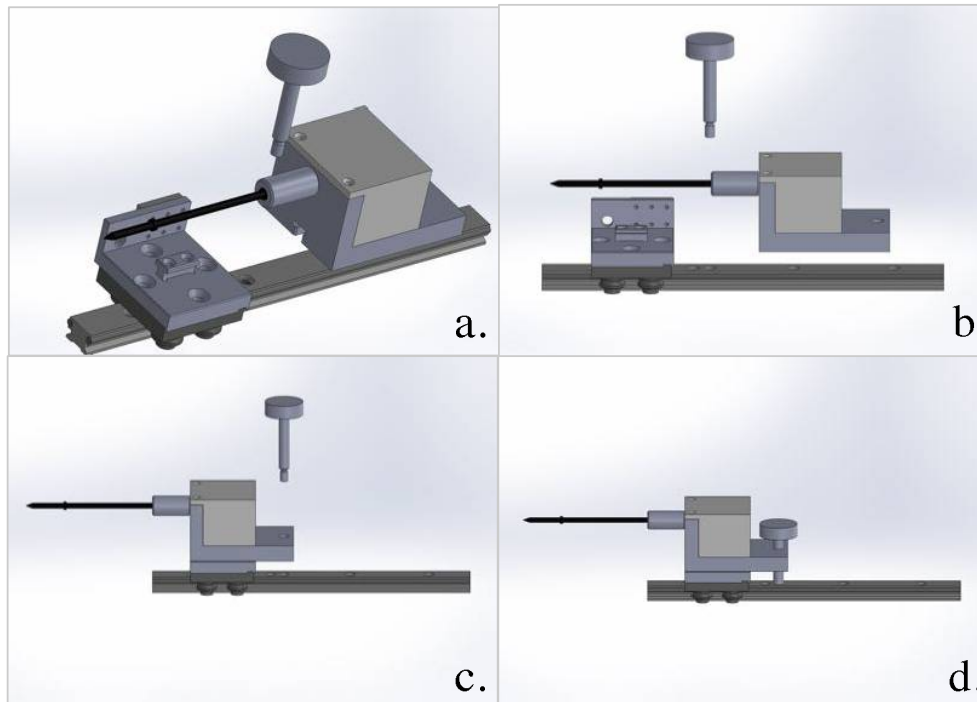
Cannula holder mounting sequence. The holder is mounted on the carriage adapter through a T-coupling. The base of the holder houses a T-track that complements the T-nut on the adapter (a). Once the holder is properly mounted on the adapter (c), the carriage position along the linear guide is blocked screwing the knob in the threaded hole on the guide (d).
